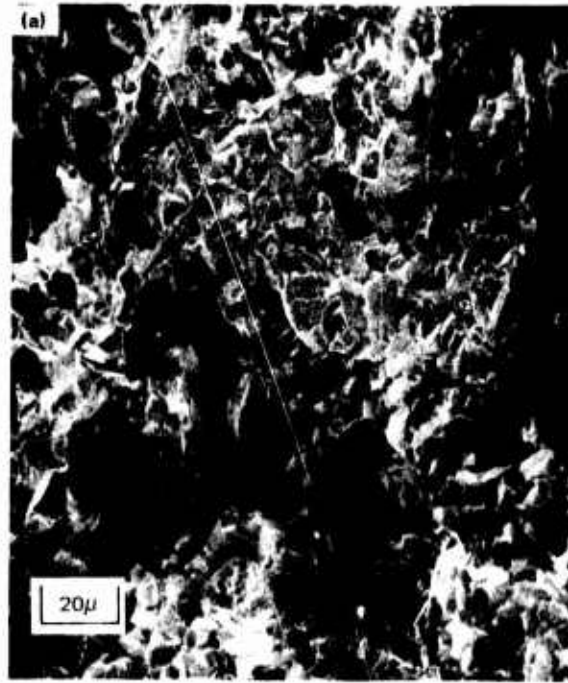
DETAILS OF FRACTURE SURFACE
